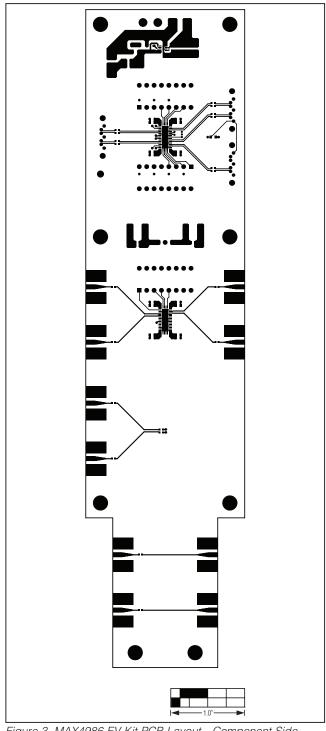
MAX4986 EV Kit PCB Layout—Component Side
